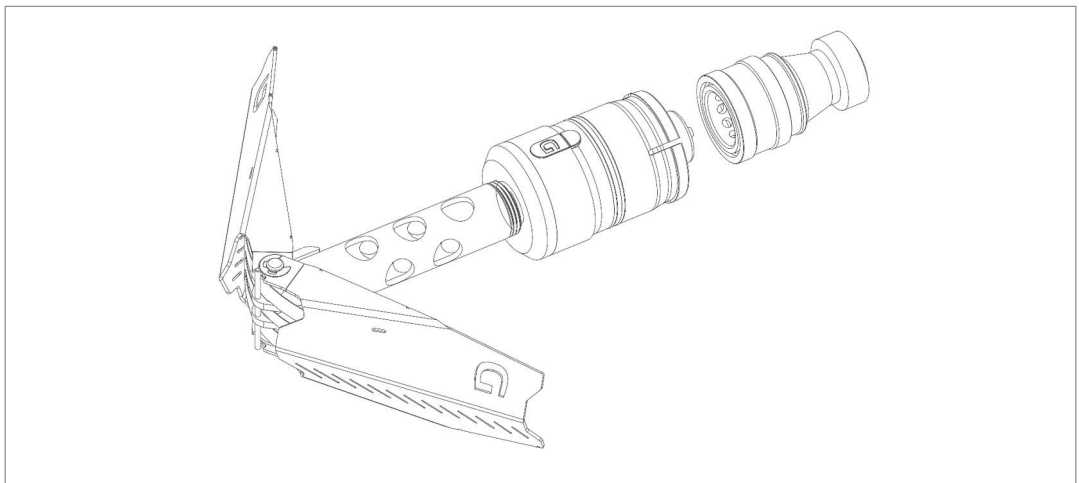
Model 6650-70MM-GA Grout Anchor
